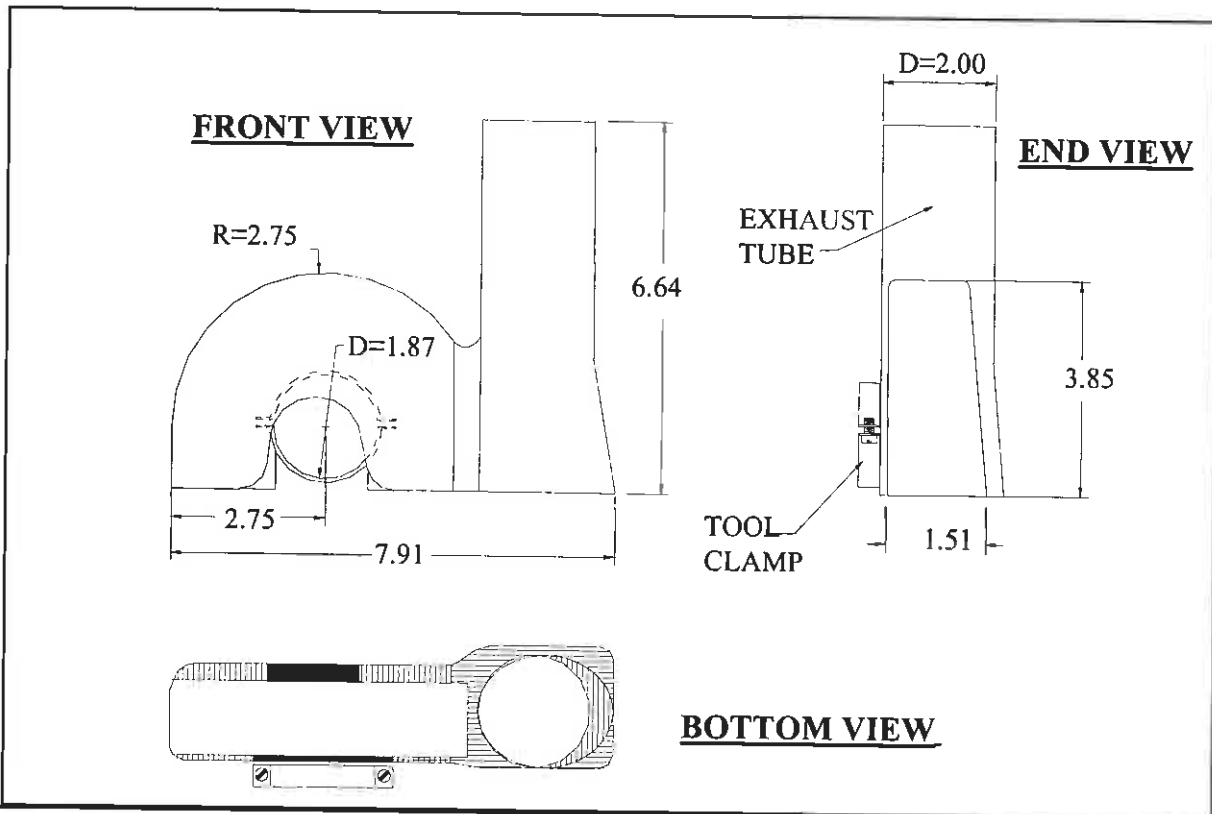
Photograph of Zantech shroud and 4-inch cutter blade mounted on a right angle grinder. In this figure, all dimensions are in inches and "D=" indicates that the dimension is a diameter.
